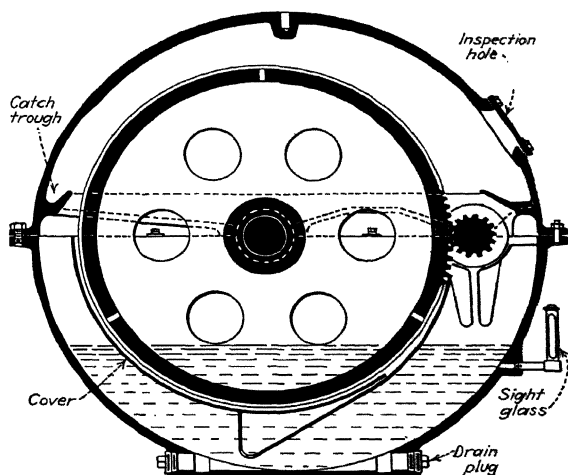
Splash-oiled reduction gear set. (Courtesy Socony-Vacuum Oil Co.)
